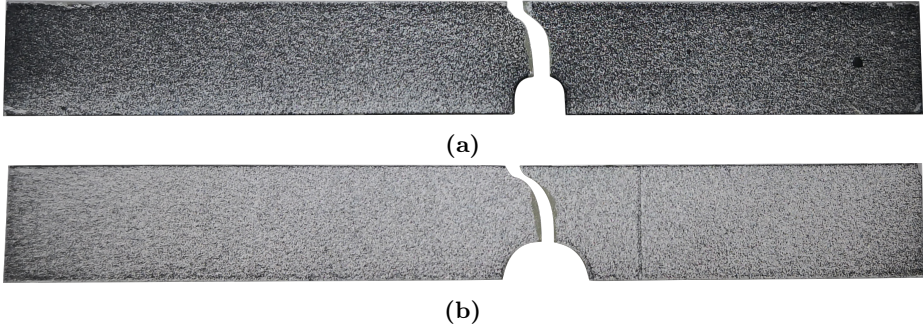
Fracture path in (a) an R1.25 specimen and (b) an R2.50 specimen.
